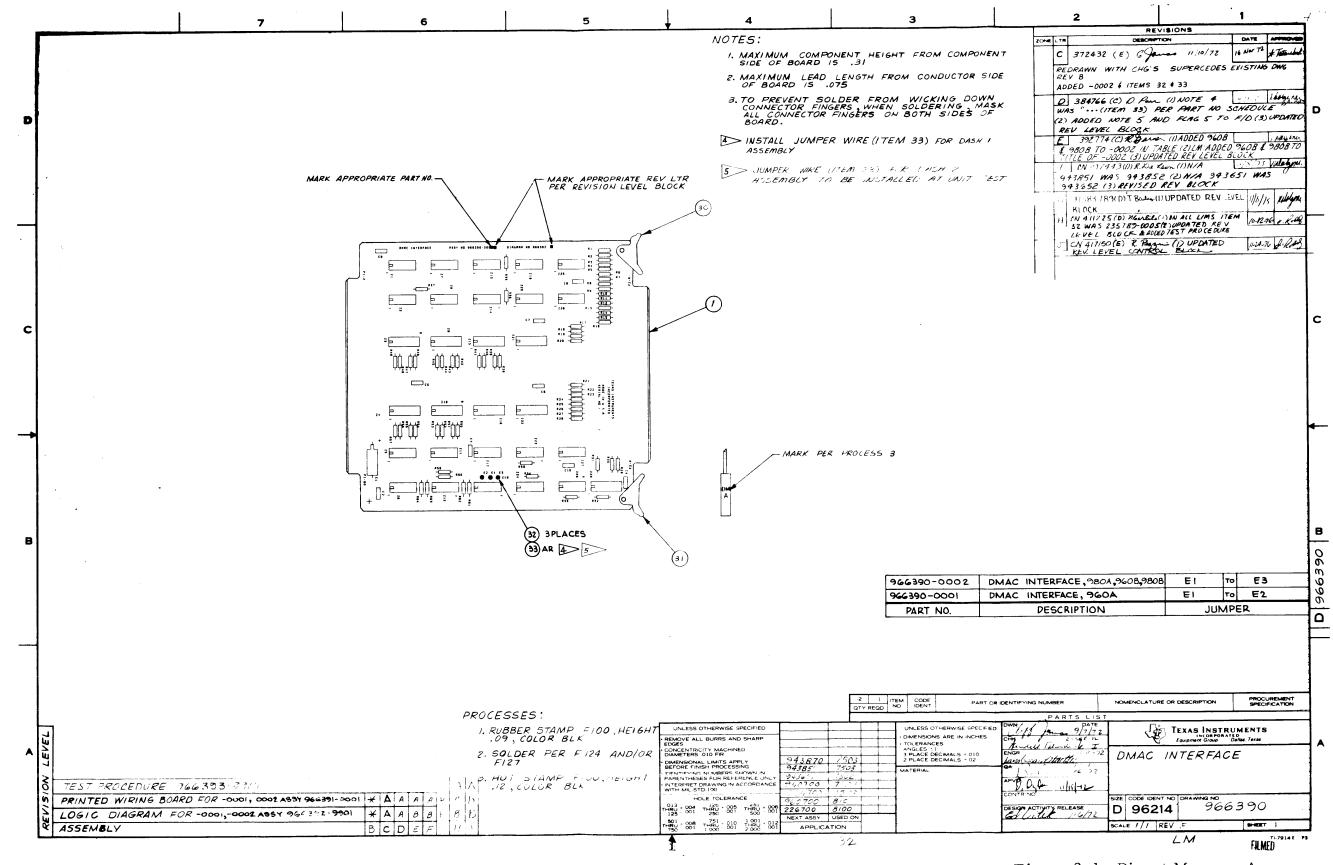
Direct Memory Access Interface Card Assembly Drawing
